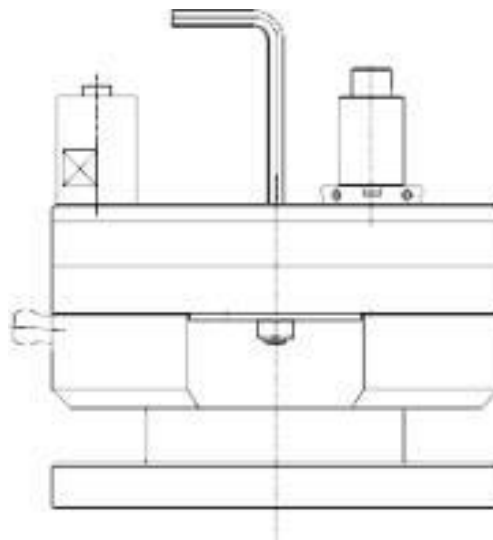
Set the roll start position / Tensioning the radial rolling head E
